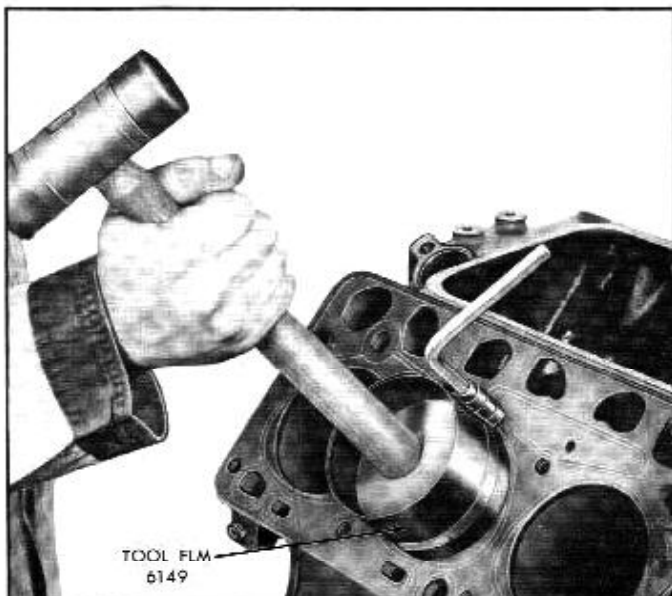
A-57—Installing Piston Assembly in Cylinder Block
